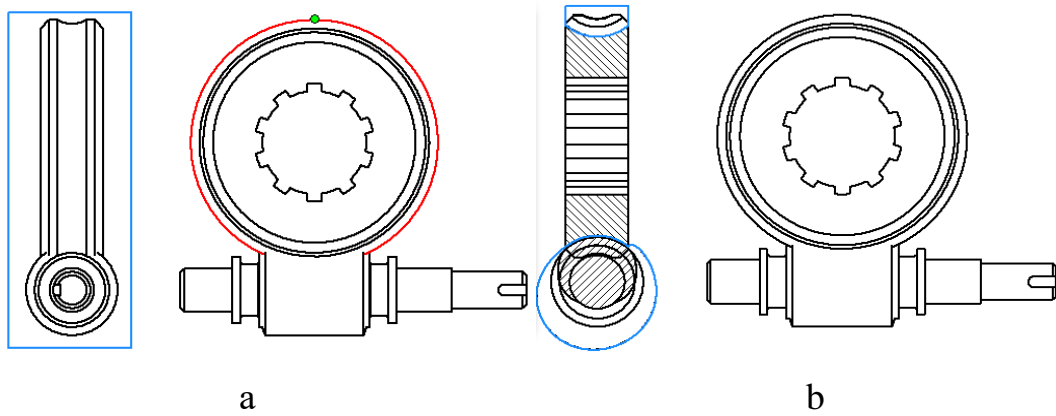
a - 1st local section "From point" to the worm's generative part (worm wheel); b - 2nd local section "Through part" part - worm and worm wheel
